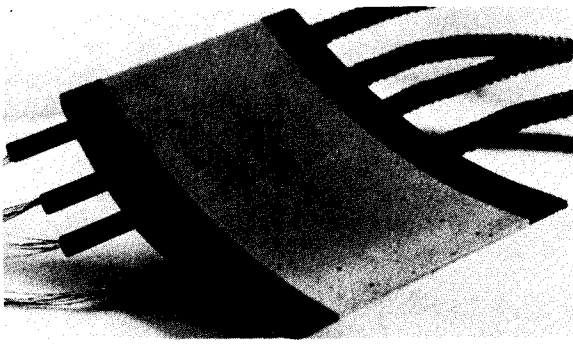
Blade assembly with heating connections and thermocouple leads. Black surface spots near the blade outlet are filled holes above constructional screws
